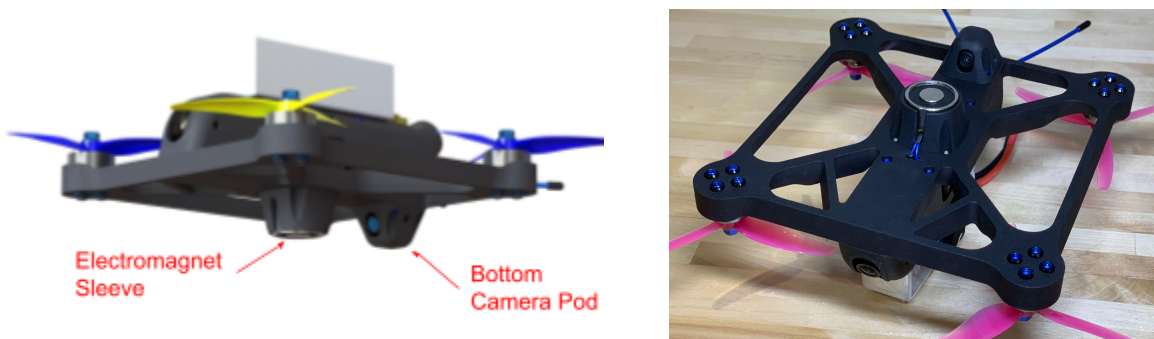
Finalized CAD model highlighting the electromagnet sleeve and bottom camera pod.
